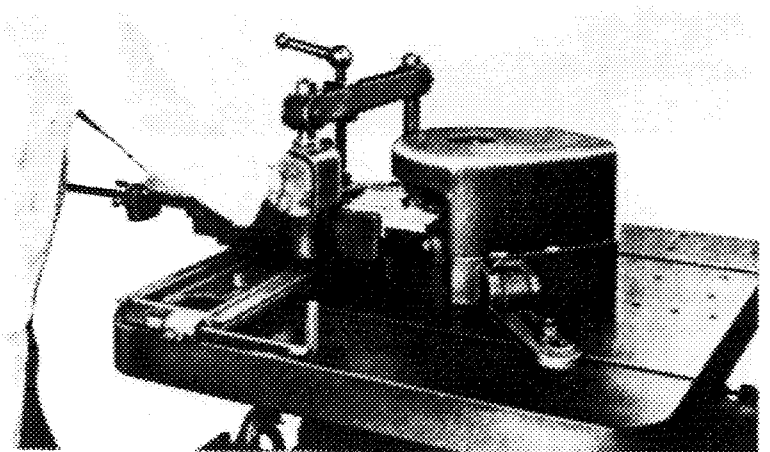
With this corner locking attachment, corners can be locked on boards up to 3 in. deep on a spindle moulder/shaper
